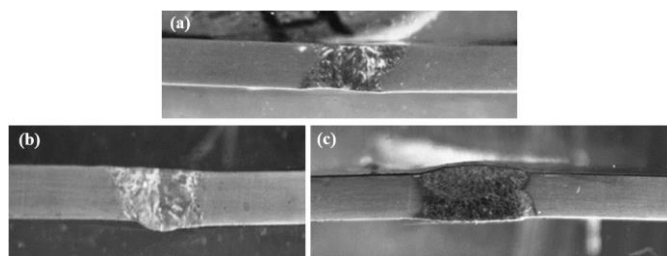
Macrographs showing the cross-section of the welded joints: The welded joint produced with a heat input of: (a) 3.92, (b) 4.25 and (c) 4.57 kJ/mm. (thickness: 3mm).
